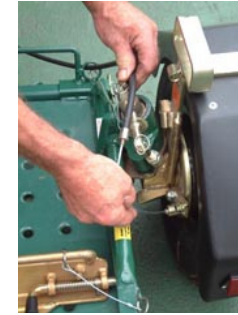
Fit brake cable to wheel assemblies. (thread cable thro' rjngs).
